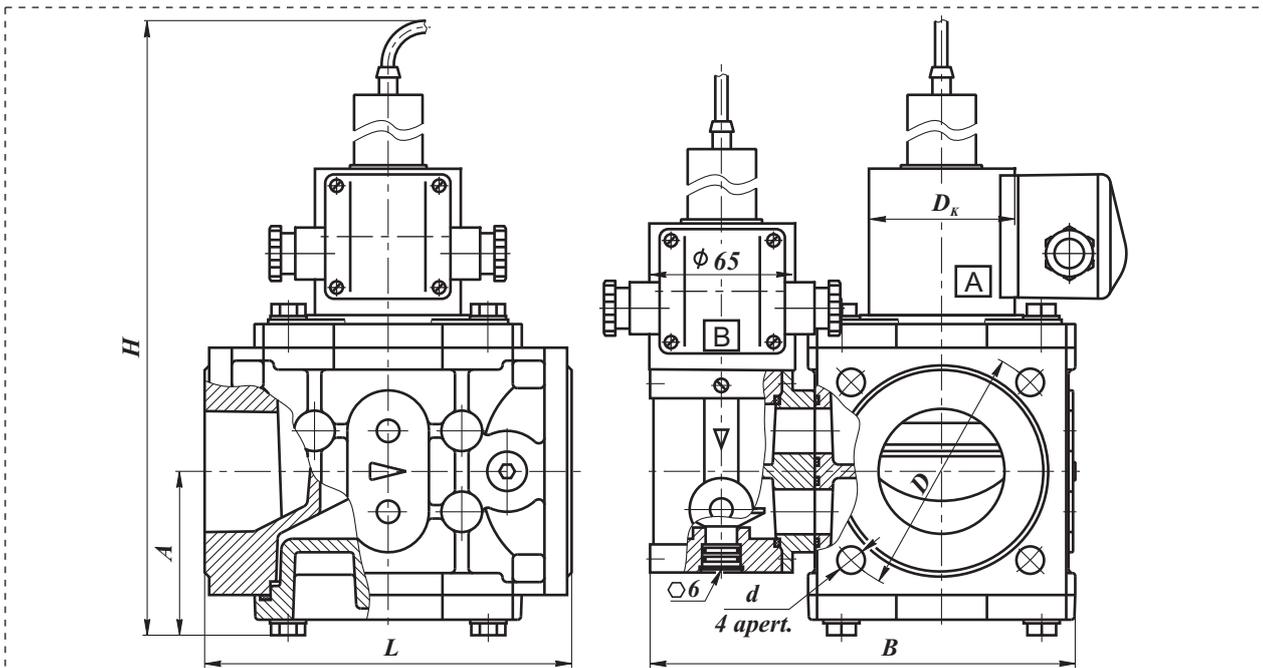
Three-position solenoid valves DN 40, 50 mm, flange connection, with one gas flow regulator and position indicators
